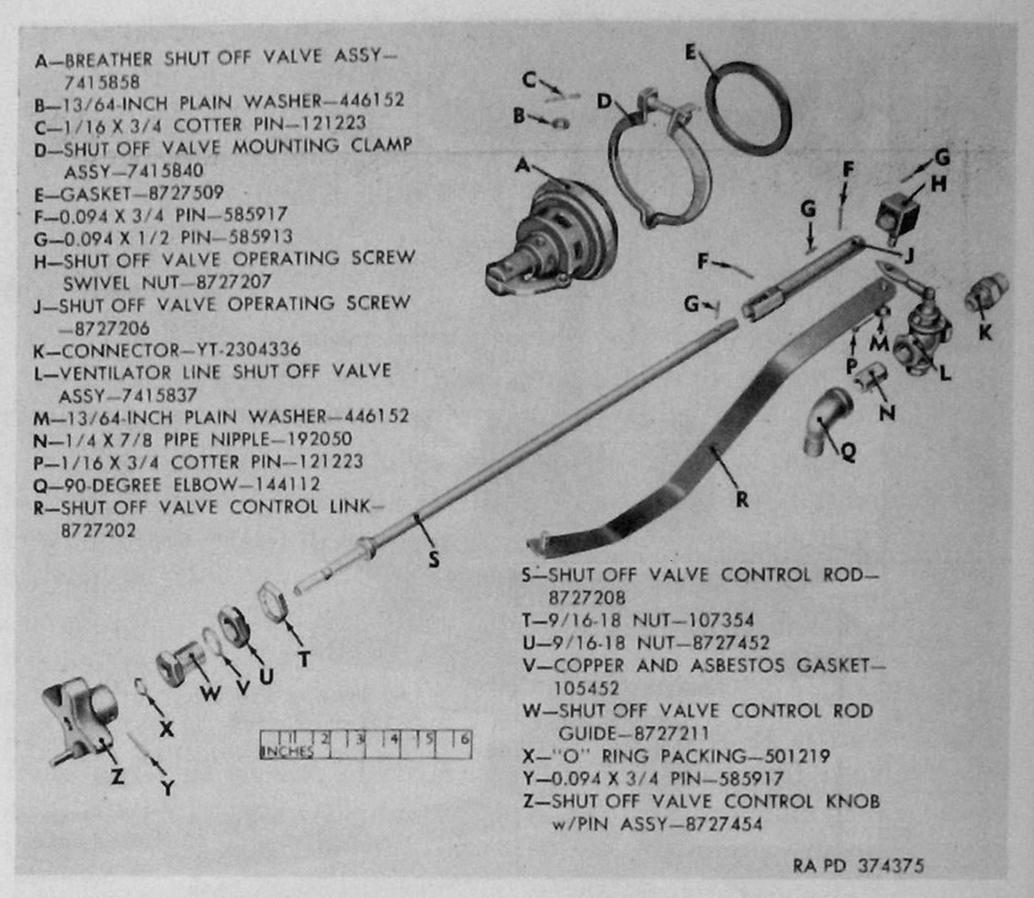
Breather valve and crankcase shutoff valve components—engine assembly 8726920.
